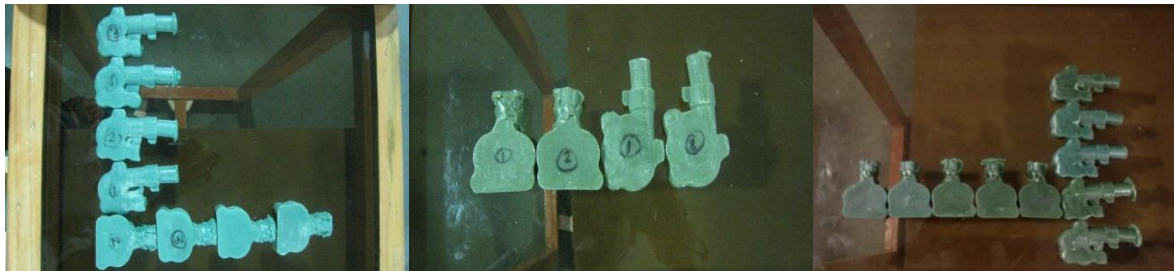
Pattern wax, Sprue wax and Machine wax samples
